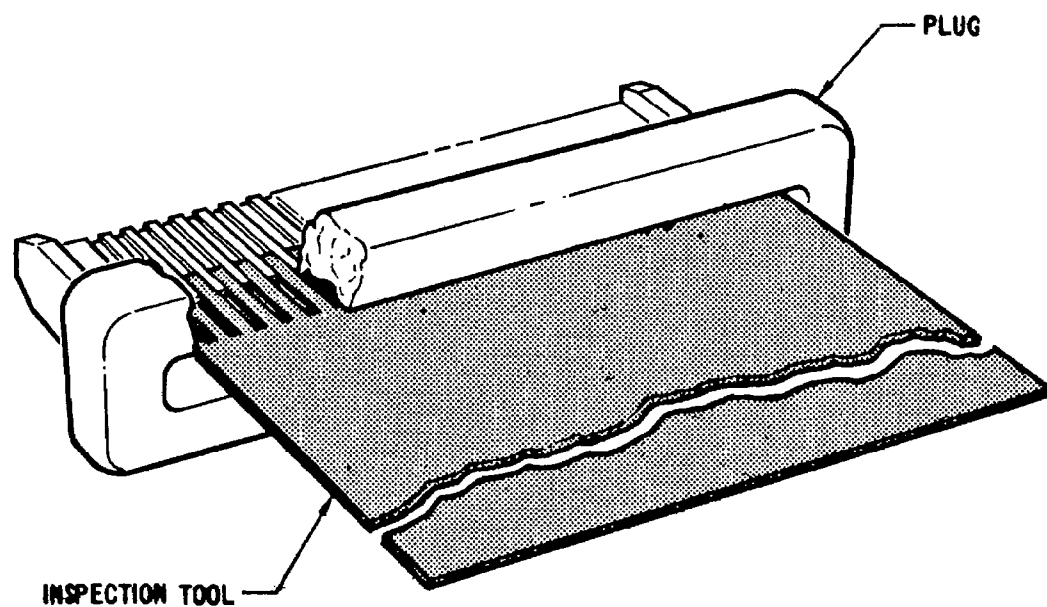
Plug window dimensional inspection tool and flash remover.
